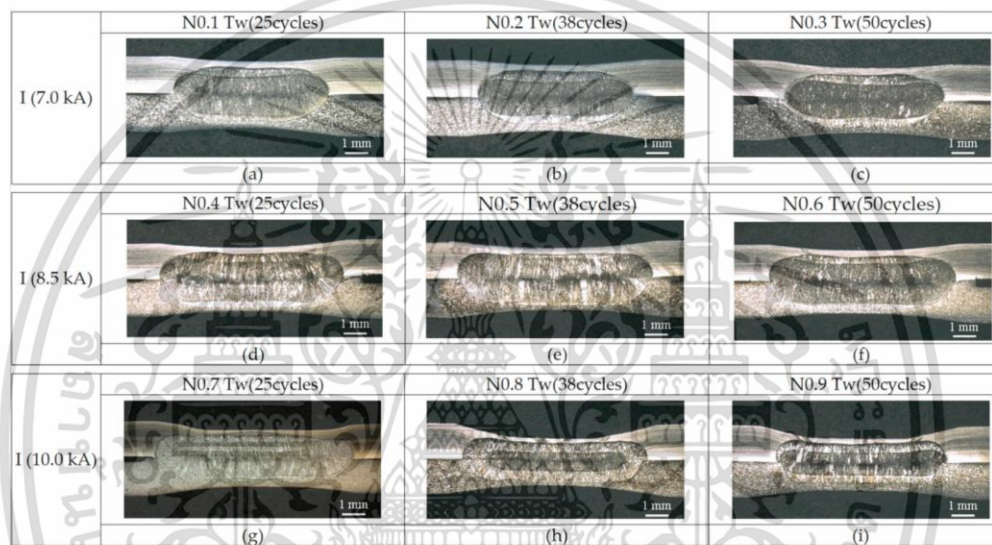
Macrostructure of RSW joints under welding parameters: weld current(kA)/welding time(cycles) (a) 7.0/25; (b) 7.0/38; (c) 7.0/50; (d) 8.5/25; (e) 8.5/38; (f) 8.5/50; (g) 10.0/25; (h) 10.0/38; (i) 10.0/50.
